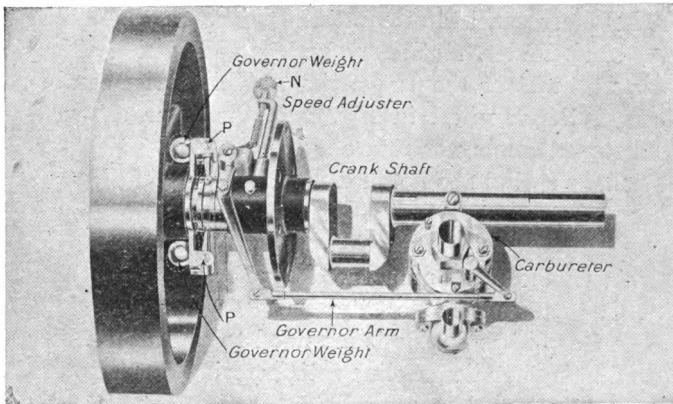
Governing Mechanism of Cushman Farm Engine.
